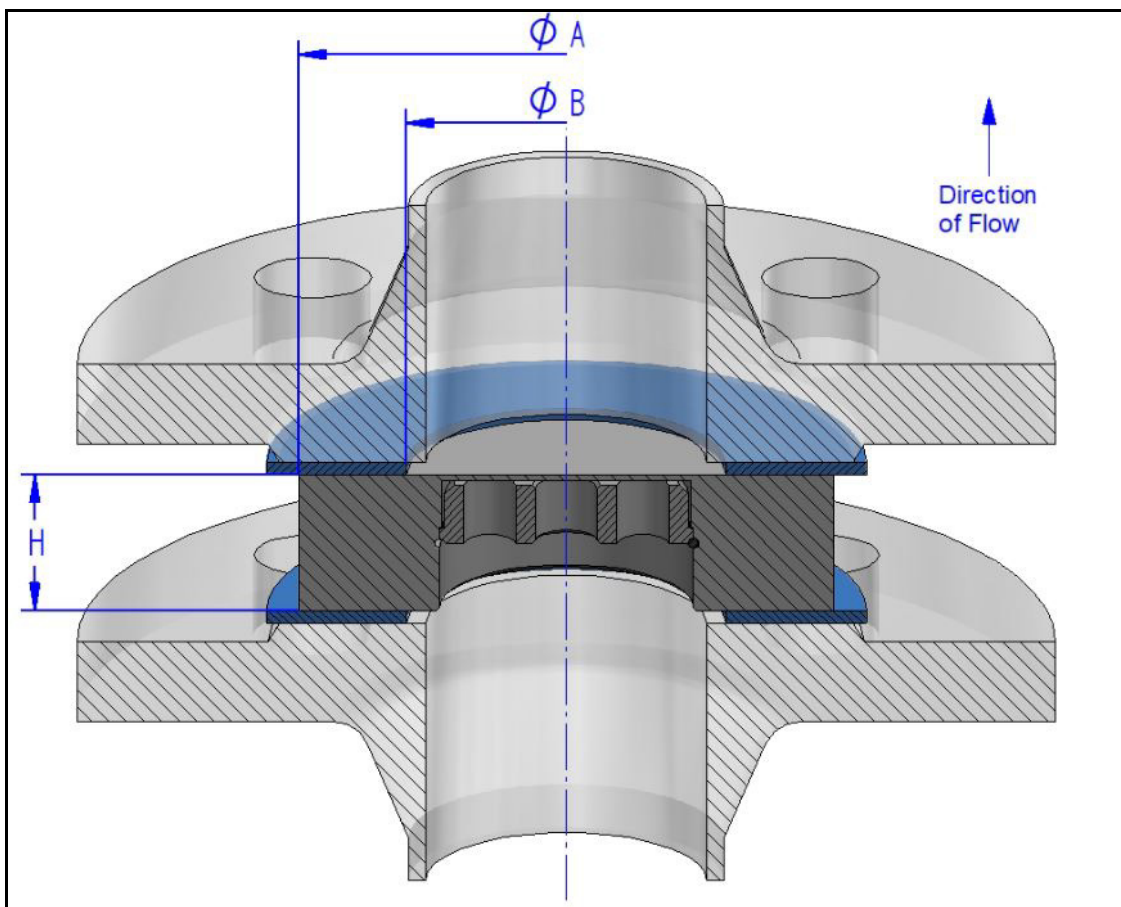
Dimensions GRX®-UK for installation between flanges
